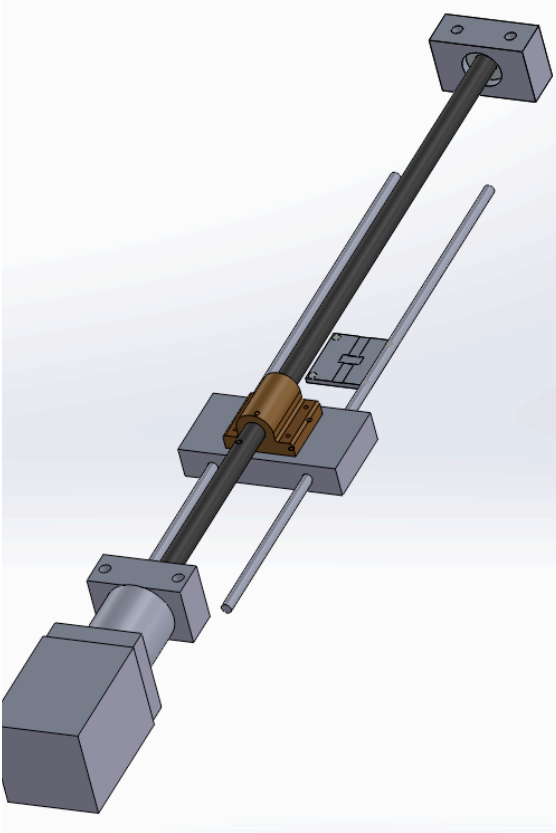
Illustration showing alternative view of Fig. B1 with better view of sample holder plate.
